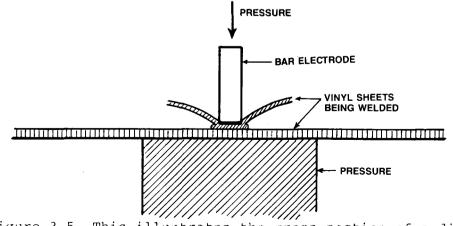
This illustrates the cross section of a die being pressed into two plastic sheets to weld them.
